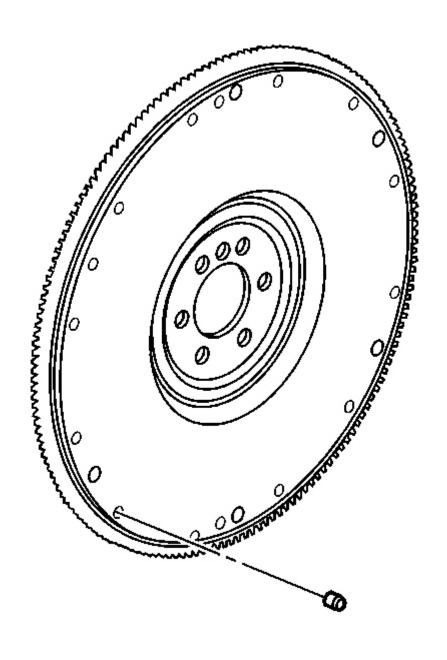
Clutch Pilot Bearing Proper Installation Position Courtesy of GENERAL MOTORS CORP.
